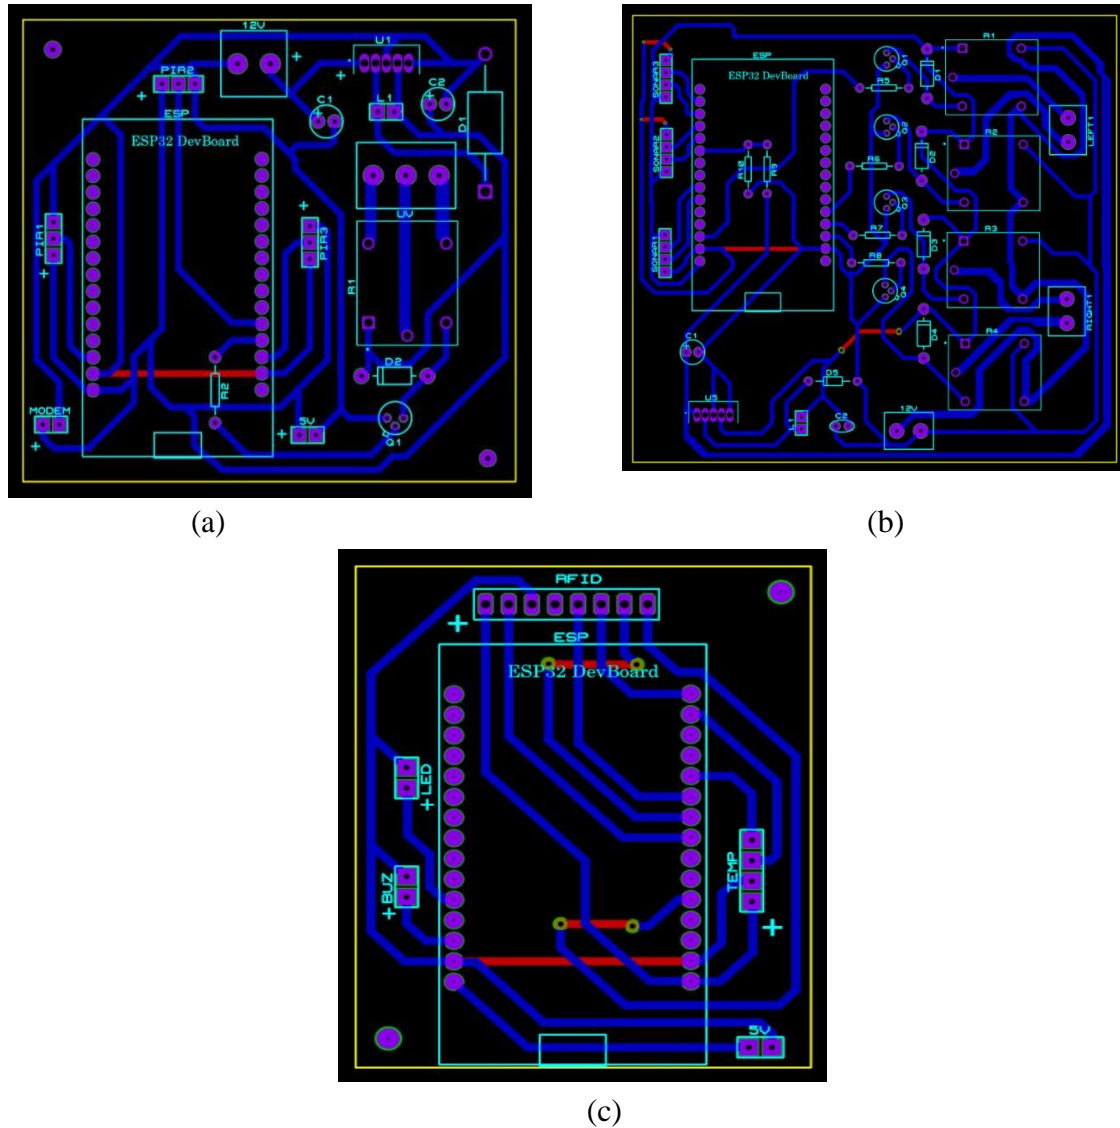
Design of printed circuit board (a) PCB of PIR (b) PCB of ultrasonic and main controller circuit (c) PCB of RFID and temperature sensor.
